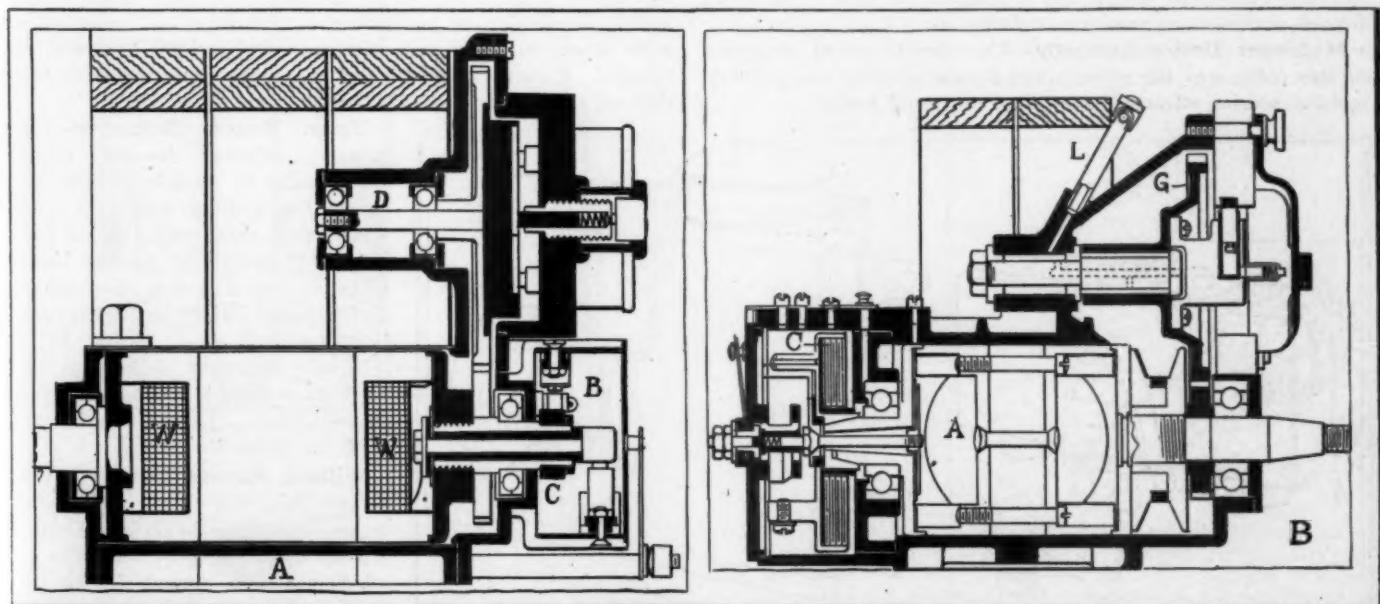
(A) Section of Splitdorf magneto, showing annular ball bearings for mounting. (B) Section of new Kingston magneto
